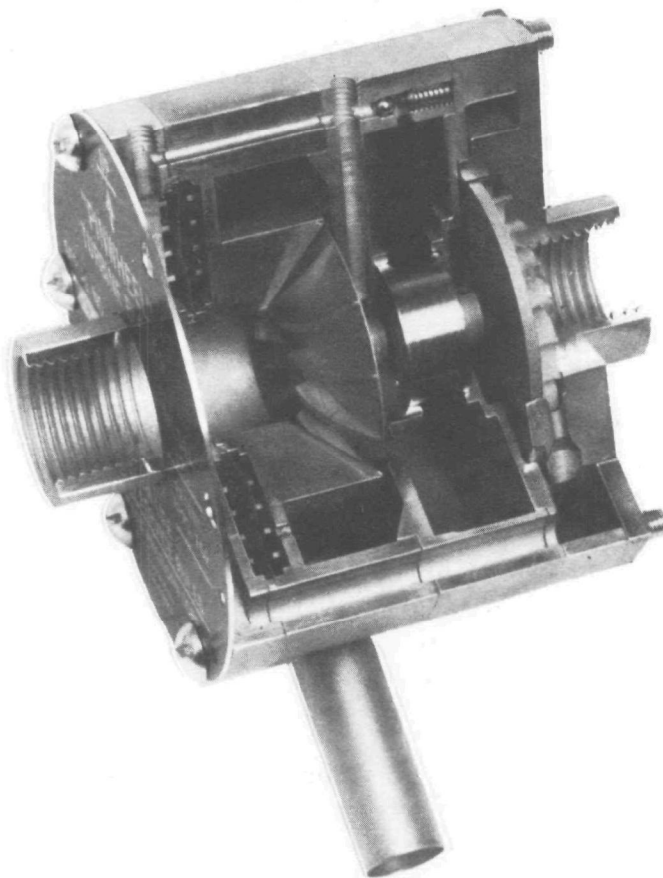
DEVICE 31 TURBINE BLOWER CONFIGURATION (DEVELOPER PHOTO)
